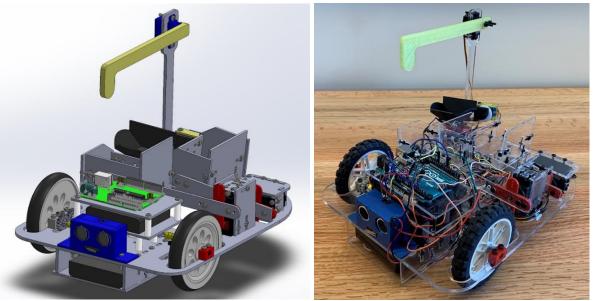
Back Right View of SolidWorks Model and Photograph of Milestone 5 Robot to dump white blocks
